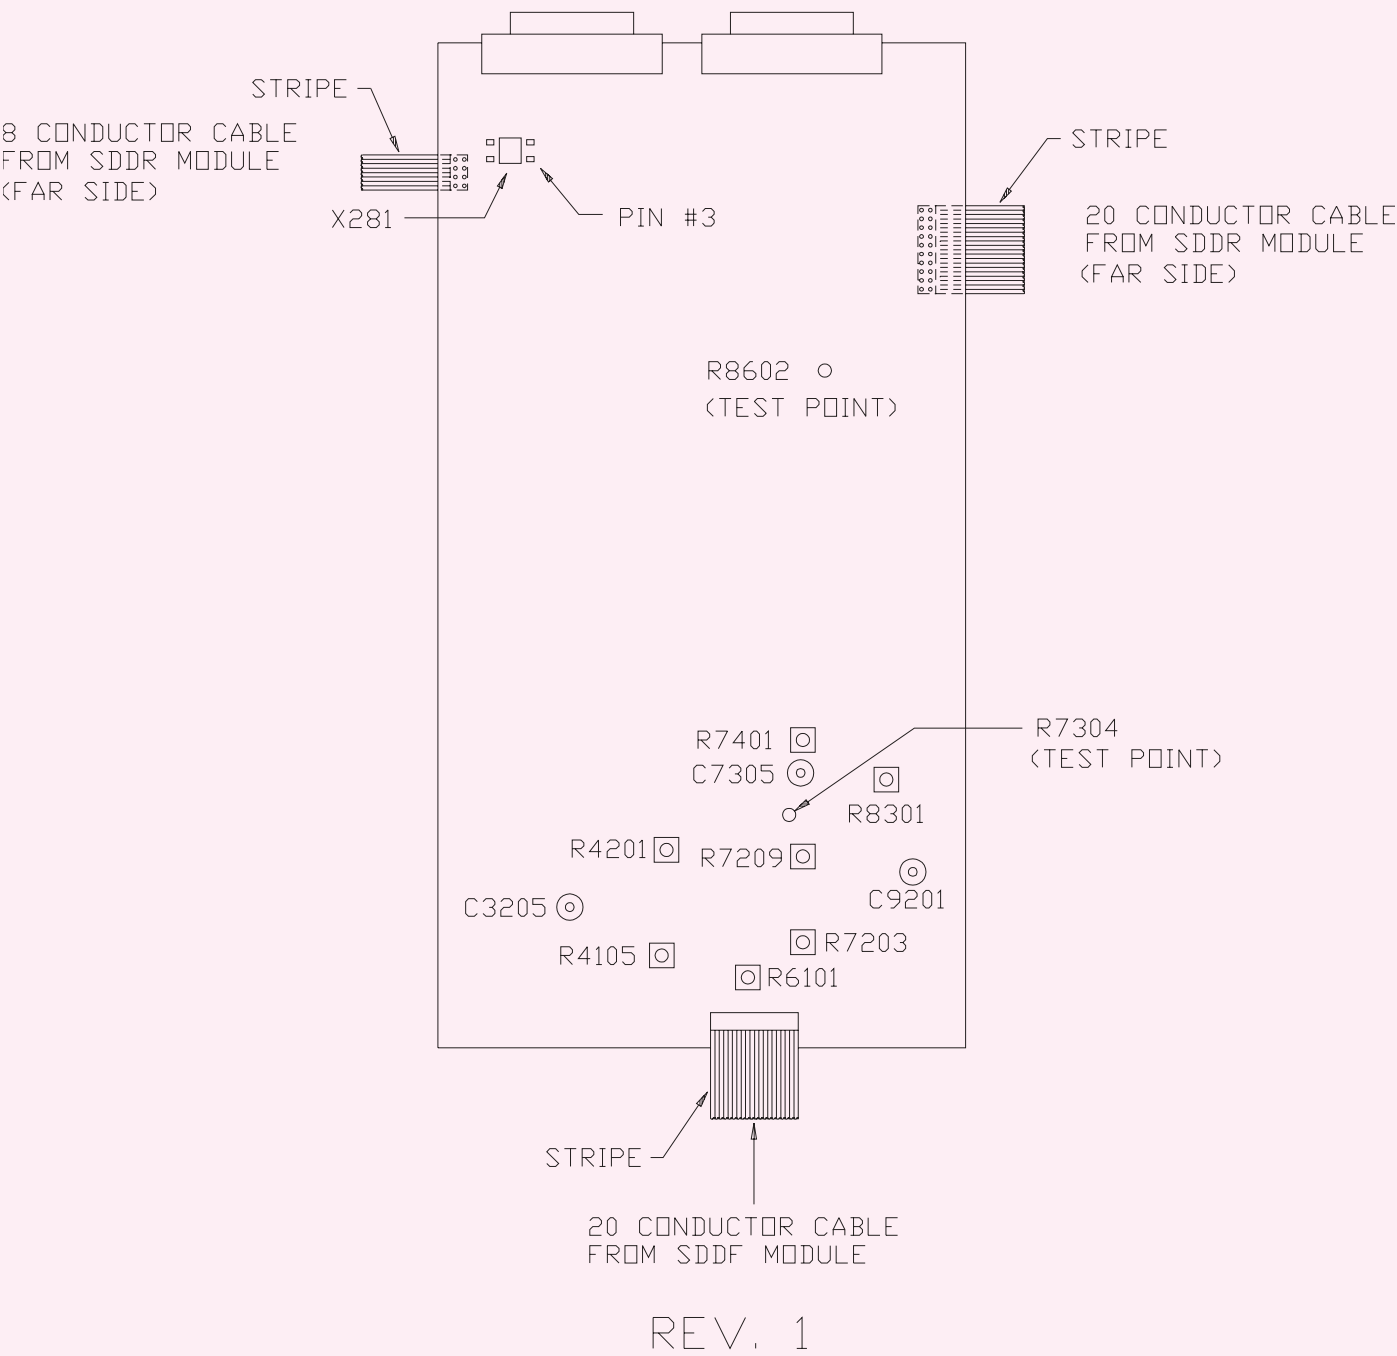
System Two DIO module adjustment locations and connections, earlier instruments (rev 1).
